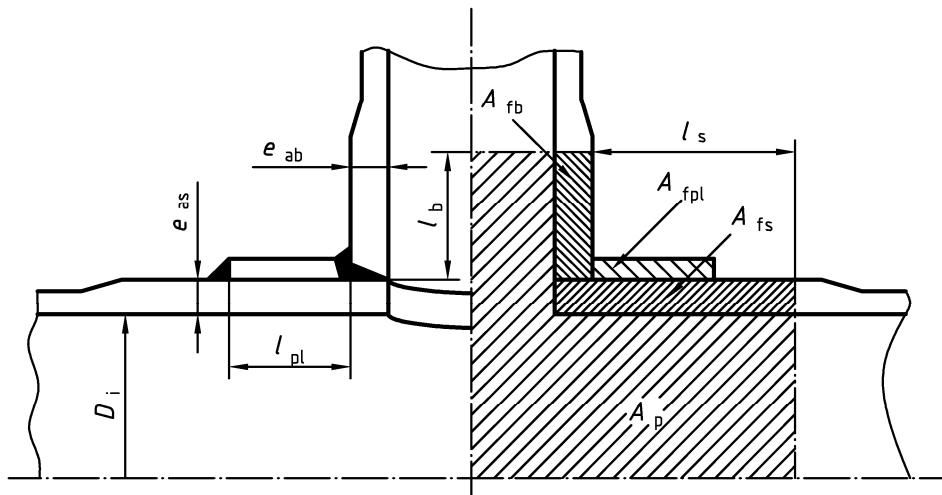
Reinforcement by increasing the wall thicknesses of shell and/or branch
